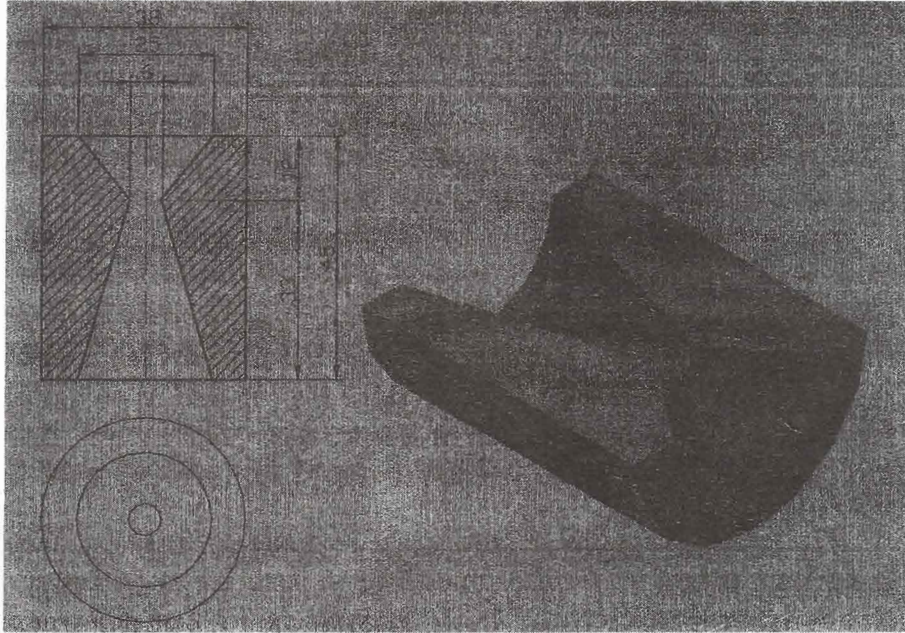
A technical and pictorial drawing of the internal part of the ionization chamber (dimensions in mm).
